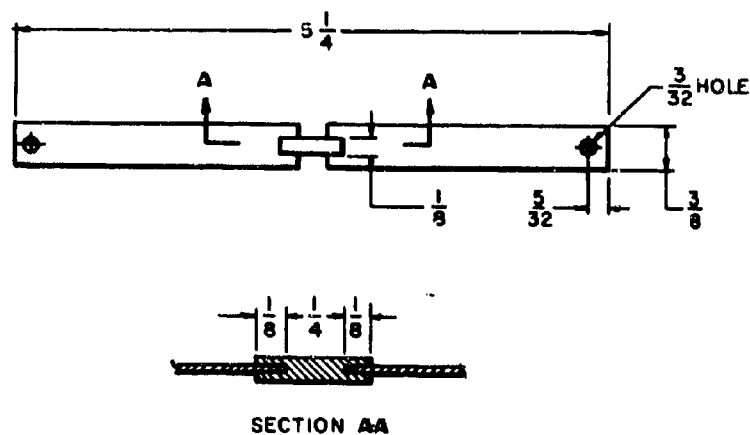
Double-Lap Brazed Joint Tensile Test Specimen
